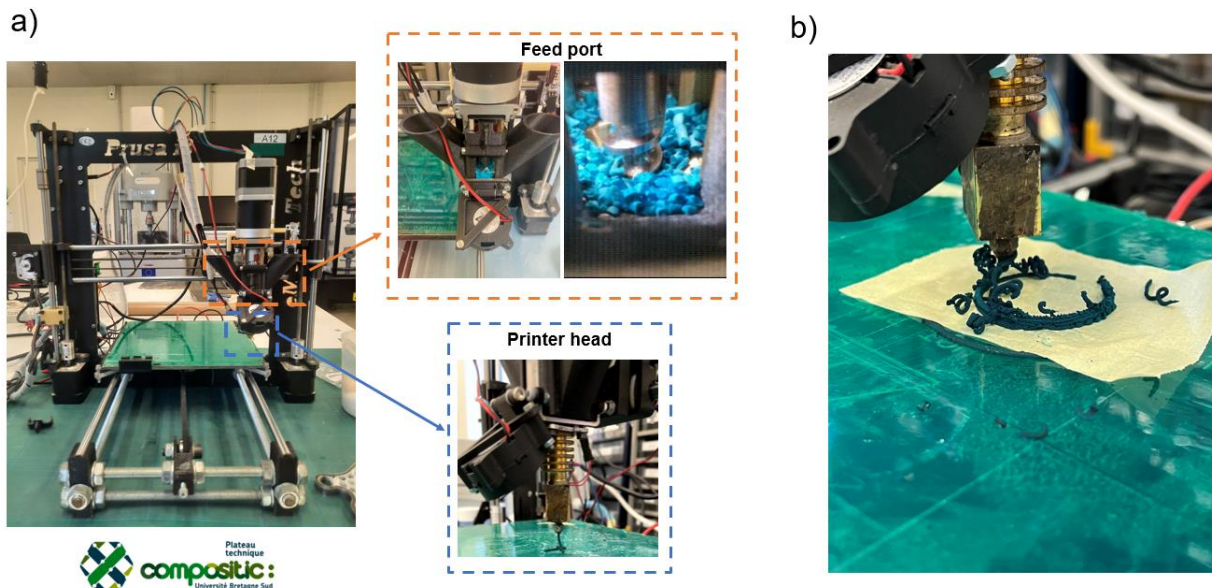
(a) FGF 3D printer used for the fabrication of 3D printed HKUST-1/TPU. (b) Printing of HKUST-1/TPU
